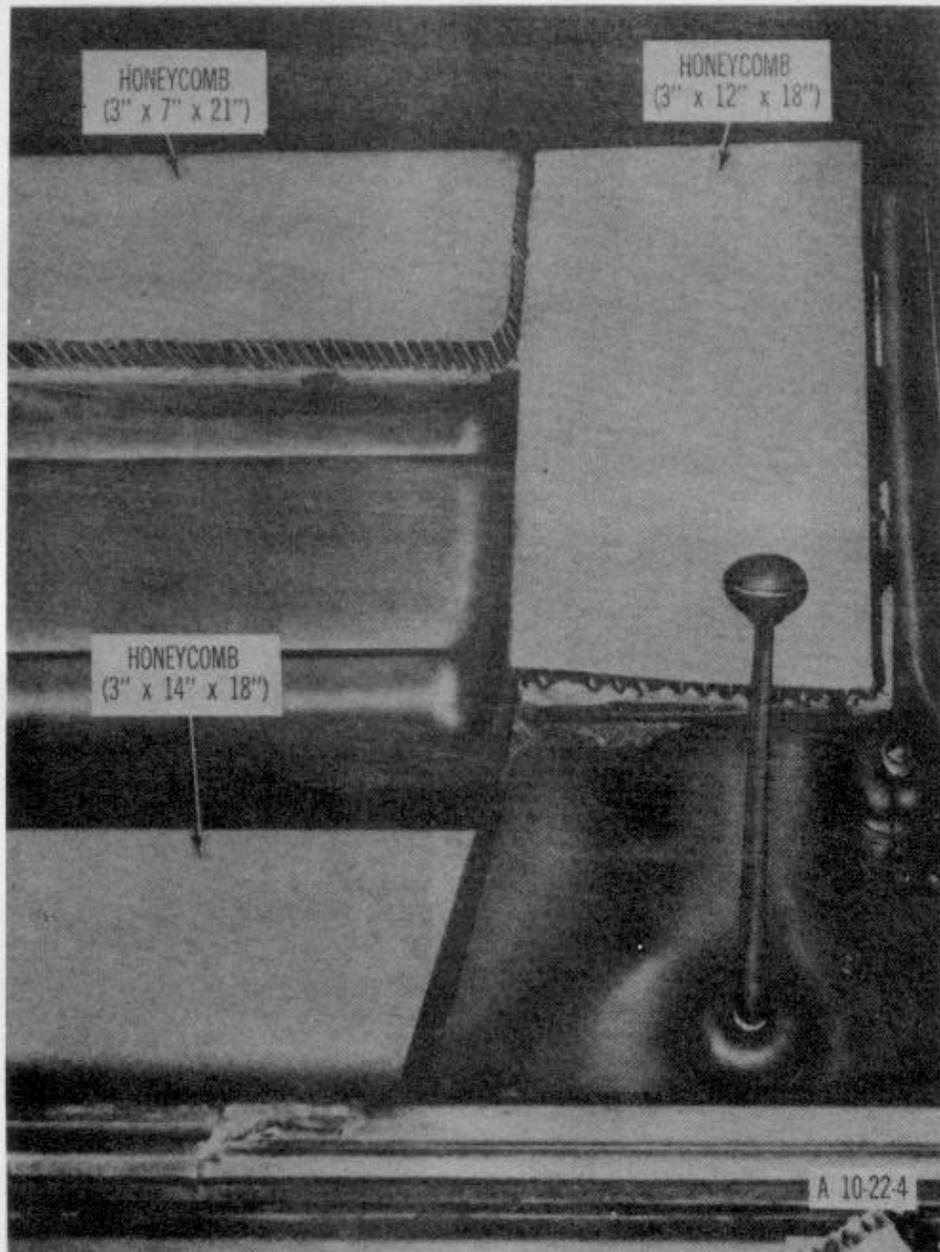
Honeycomb positioned on top of plywood and in floor on the passenger's side of truck.
